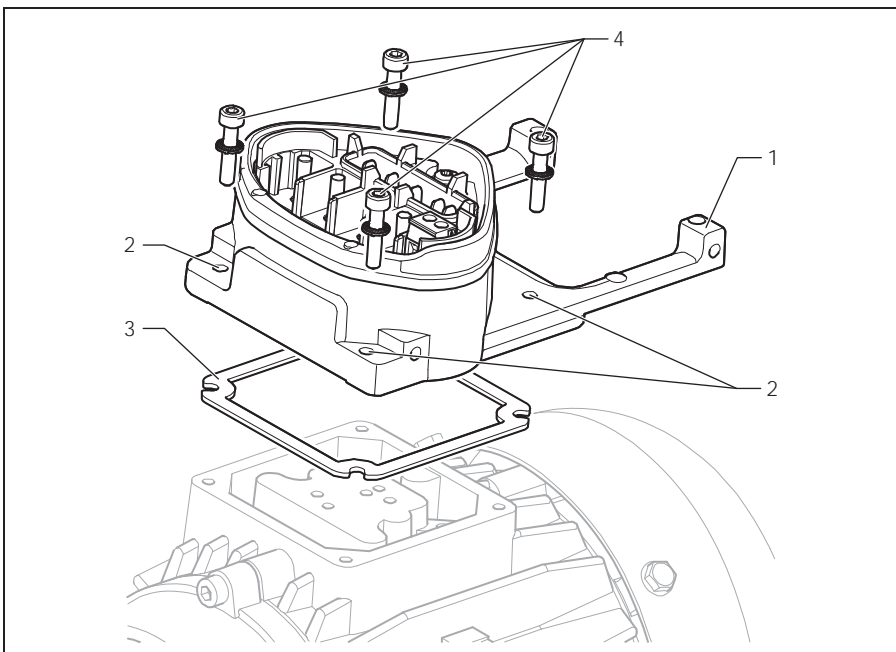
Assembly sequence: Connection box – adapter plate sizes A - C
